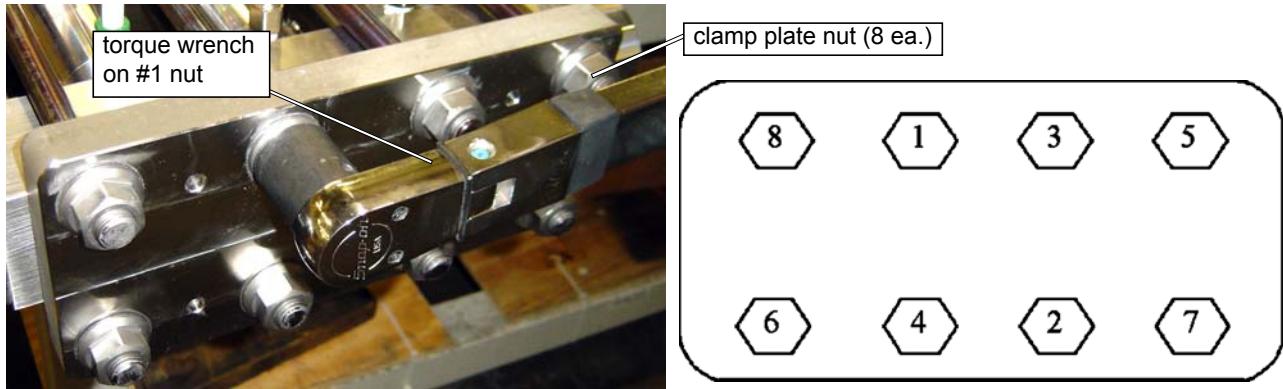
Torque Sequence for Tightening Clamp Plate Nuts
